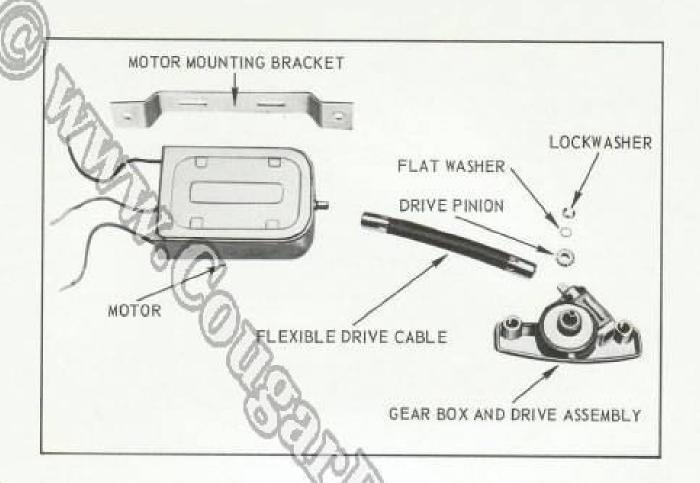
Sun Roof Panel Motor, Gear East Drive Assembly and Associated Parts
